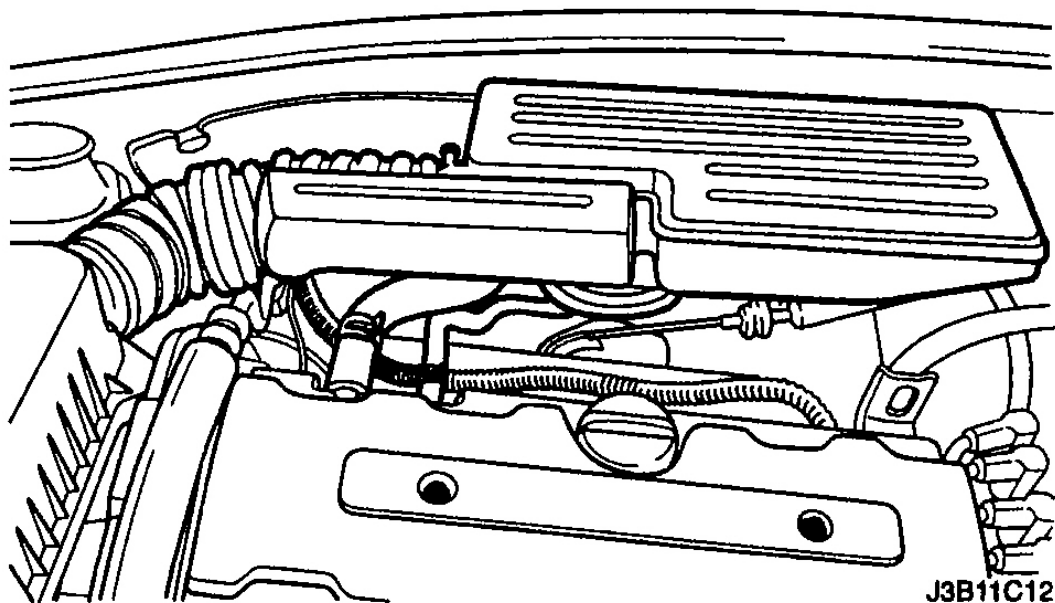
Disconnecting Air Cleaner Outlet Hose
